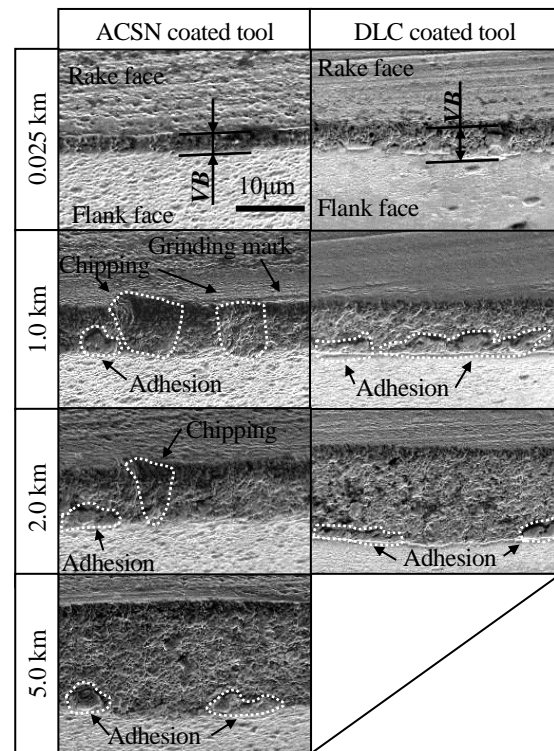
Comparison of the cutting edge of ACSN coated tool and DLC coated tool with increasing of cutting length.
